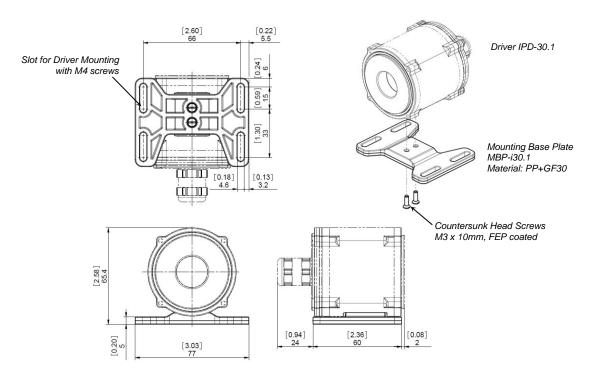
Basic dimensions (in [mm] and [inch]) of OEM driver of mounting base plate MBP-i30
